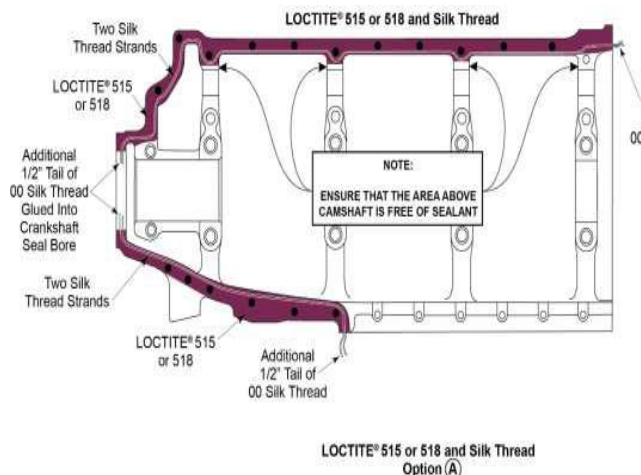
Lycoming SI 1125E – Alternate Crankcase Parting Surface Sealants
